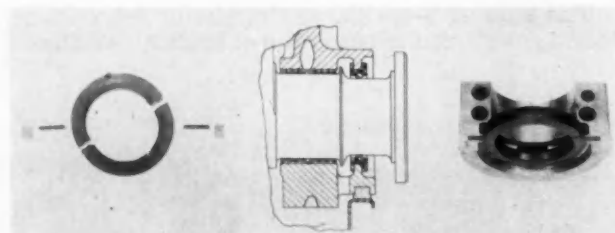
To prevent leakage at the rear of the crankshaft, the sides and face of the bearing-cap, as well as the shaft, must be sealed
